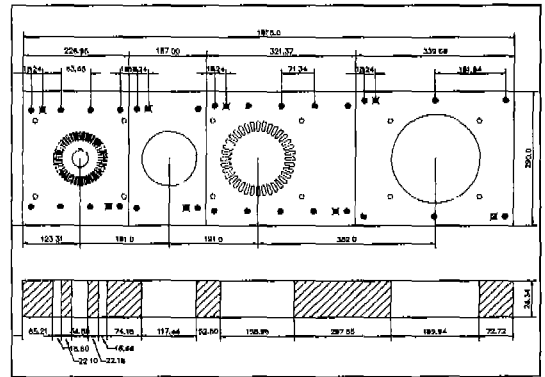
Part drawings for a upper Die of stator and rotor: b) punch holder
